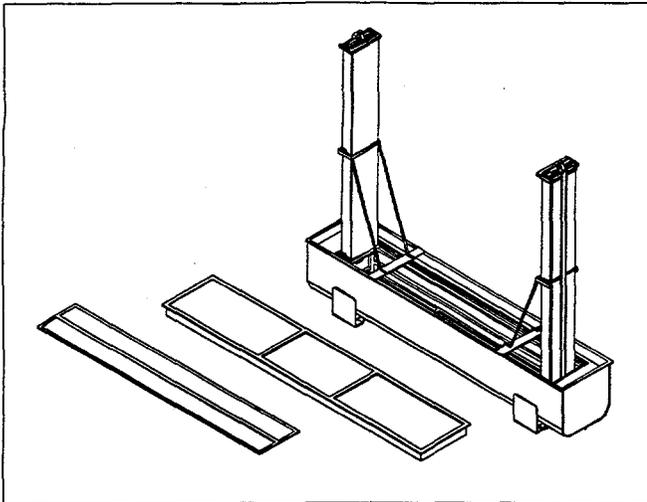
Double-strongback MOX package concept for PWR fuel (ready for unloading)
